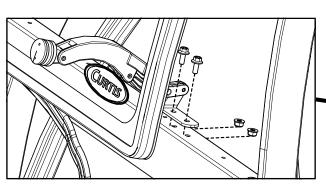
(Pop-Out Latch Bracket Installation)
